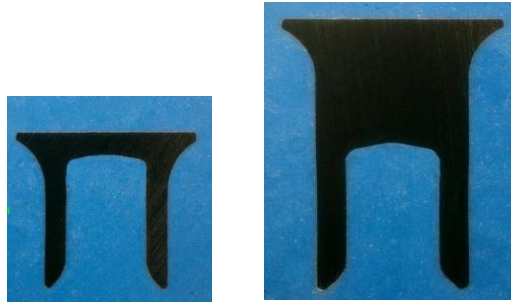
, Cross section of C-rivet left & K-rivet right, showing the greater web & leg thickness on K-rivets.
